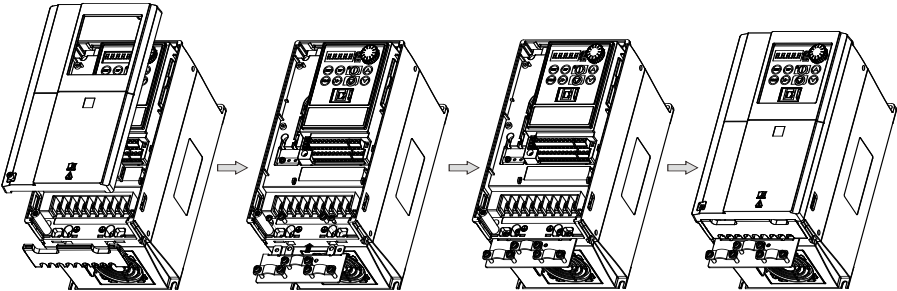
Installation diagram of cable shielding layer grounding bracket
